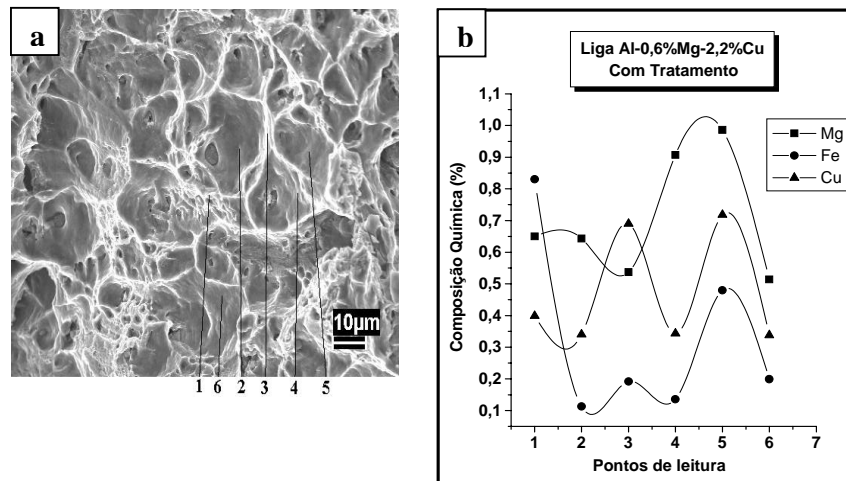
Chemical composition analysis by SEM from fracture surface. (a) Micrograph of fracture and positions of chemical examining. (b) Segregation of elements Mg, Fe and Cu along fracture surface.
